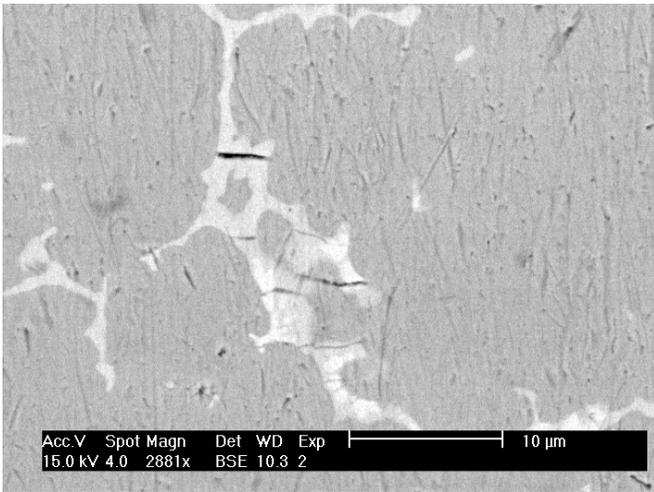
Incipient cracking in inter-dendritic region of weld between outlet strut and valve ring.
